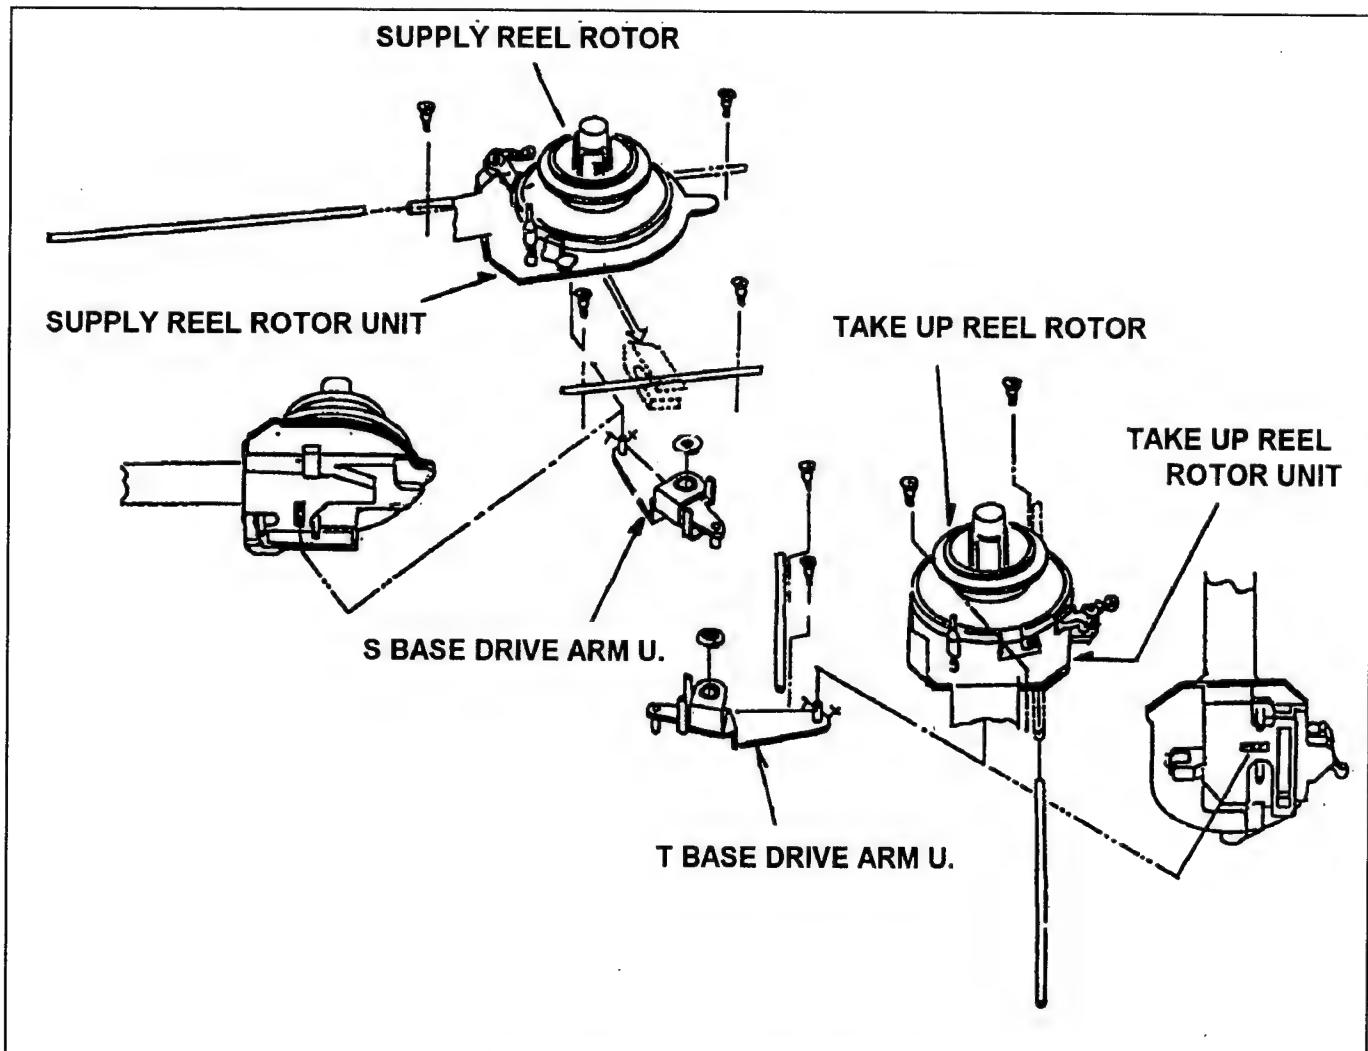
Install of S & R Reel Rotor Unit
